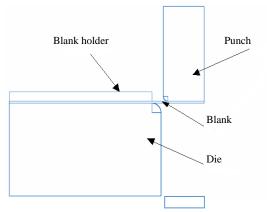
The geometric model of the U-shaped parts achieved by hot contact bending.
